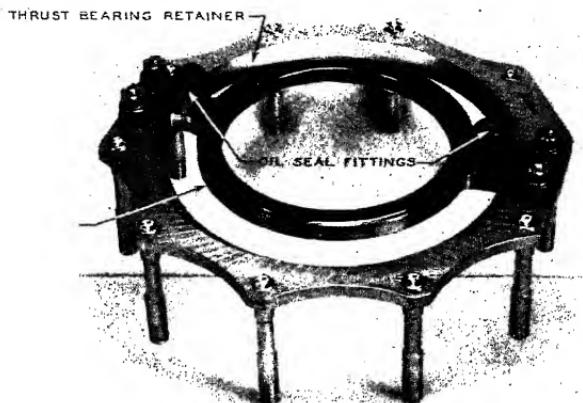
Thrust bearing retainer and oil-seal assembly.
